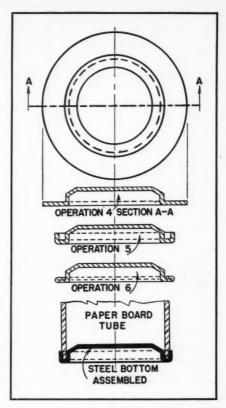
Drawing showing workpiece which is formed from S.A.E. 1010 No. 34 U.S. gauge steel strip. The workpiece is designed for use as bottom of a paper board tube as shown in the lower view.
